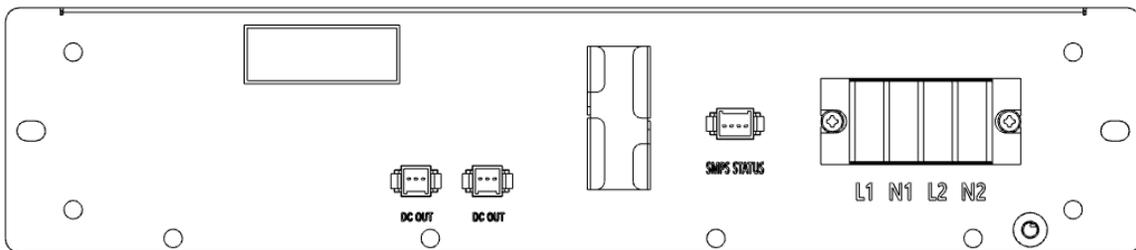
Front View of SMPS Assembly Type B, 1-Phase Input
